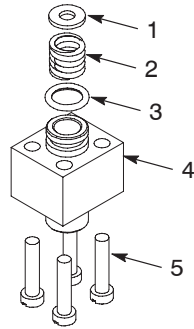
Removing the seat, O-ring, small compression spring, and lower seal support disk
